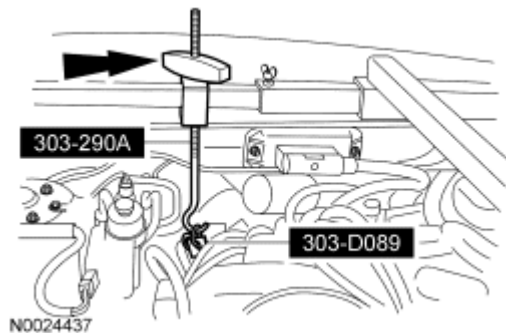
Locating Lowering Engine Onto RH Engine Mount
